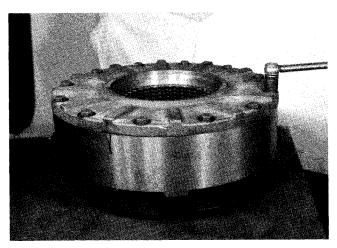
Tighten bolts 175-190 ft. lbs. torque [240-260 N.m.].
